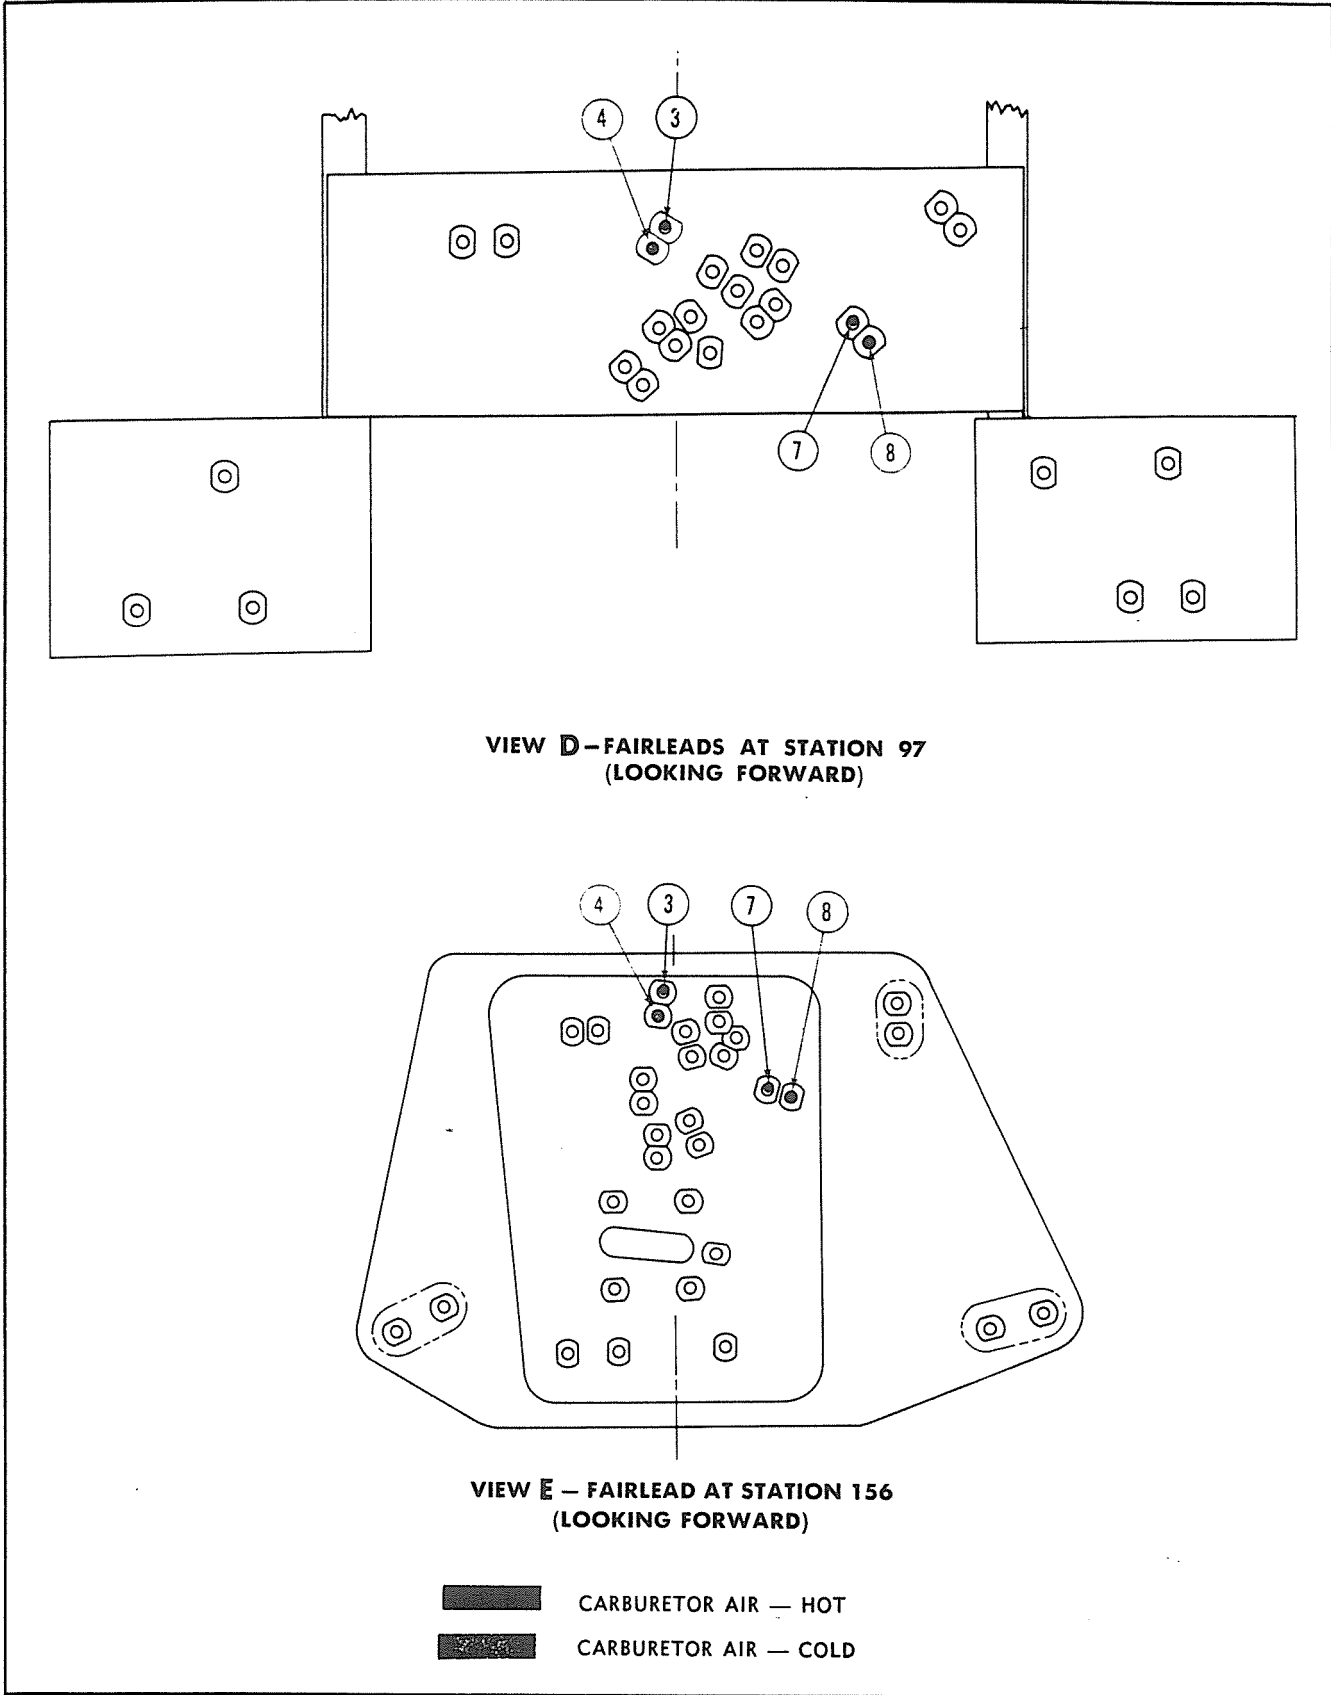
(Sheet 3 of 7 Sheets). Carburetor Air Control System — Fairleads, Stations 97 and 156
